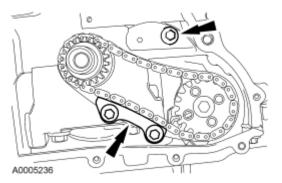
Locating Oil Pump Chain Guide & Shoulder Bolts Courtesy of FORD MOTOR CO.
